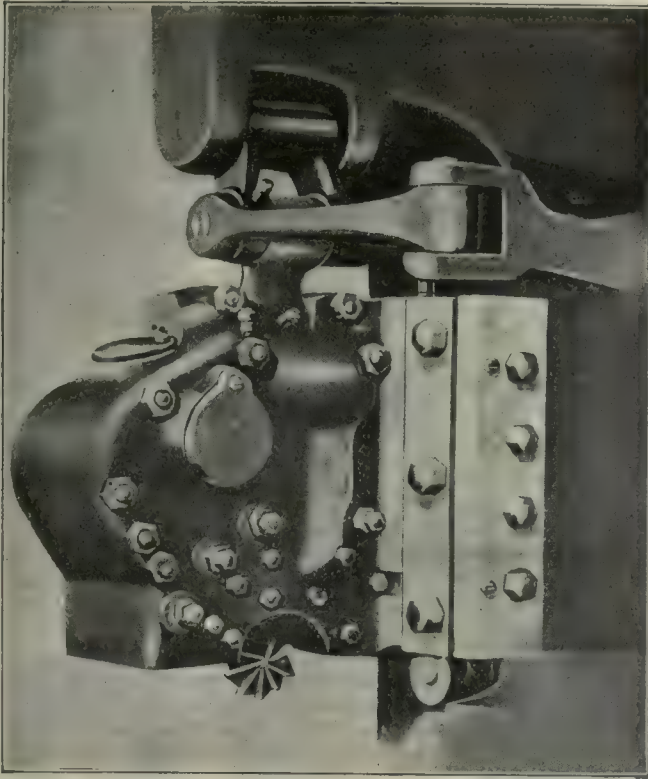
CHERRYING ATTACHMENT FOR JACKSON MACHINES
